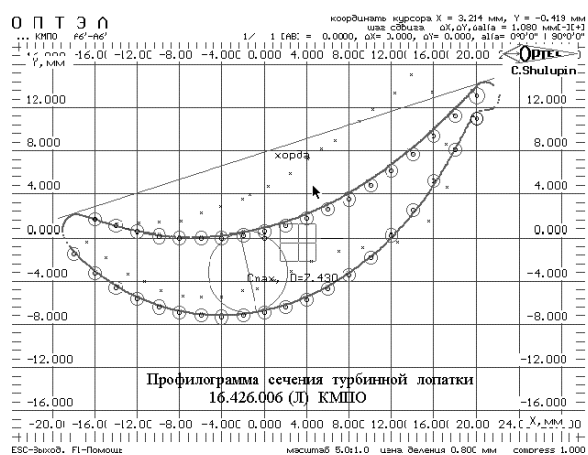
2D view of turbine blade section profile with points of drawing.
